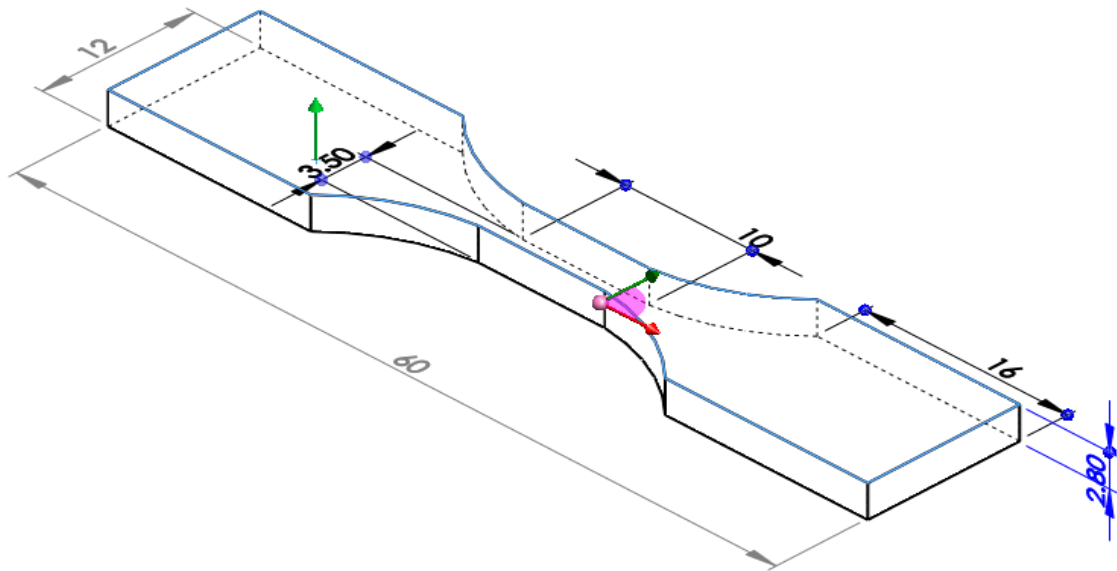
Dimensioned drawing of Tensile Dog-bone Specimen (Units: mm).
